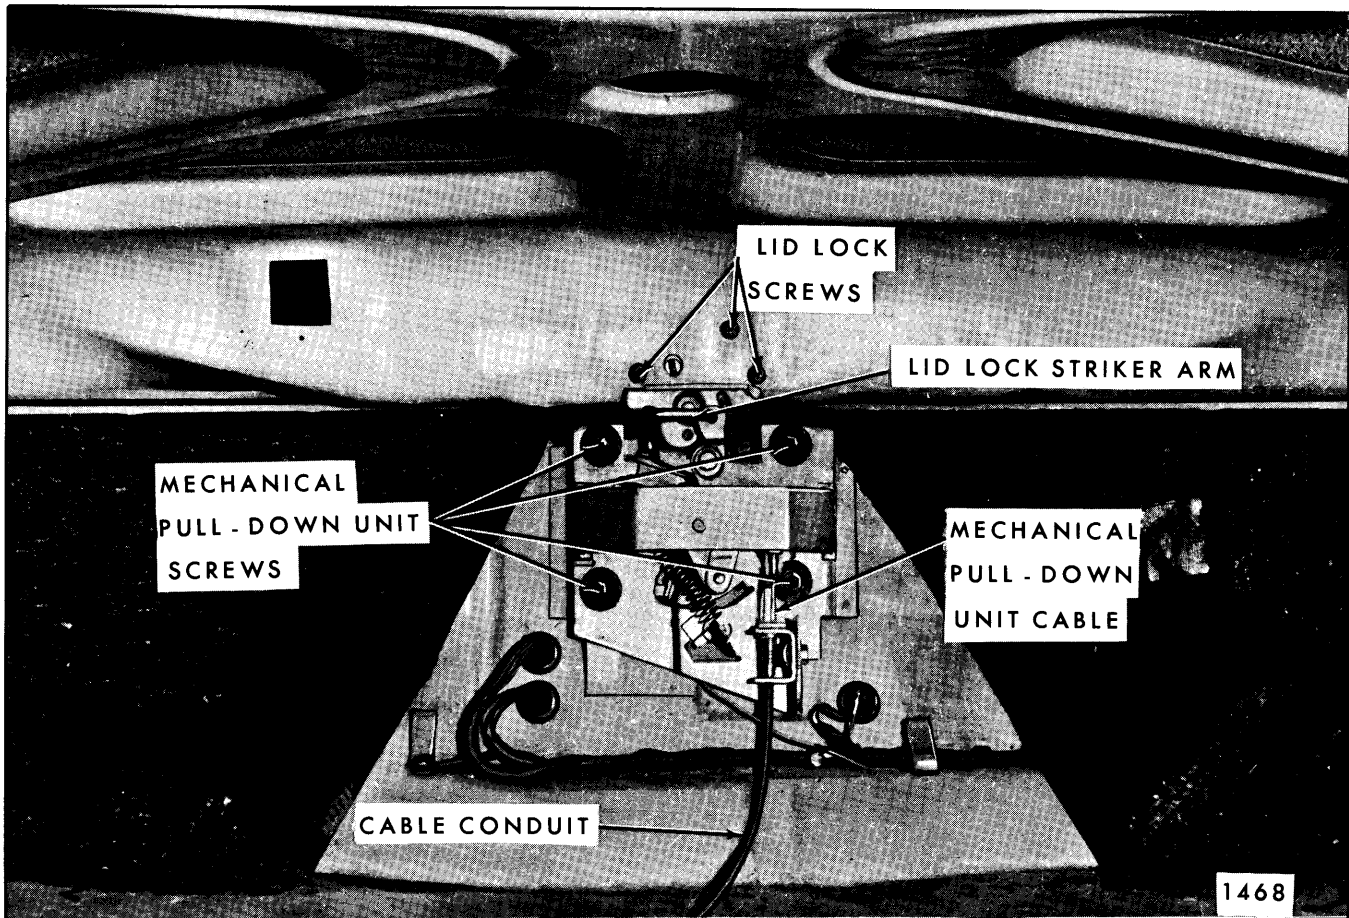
Rear Compartment Mechanical Pull-Down Unit - Cadillac Styles with Option
